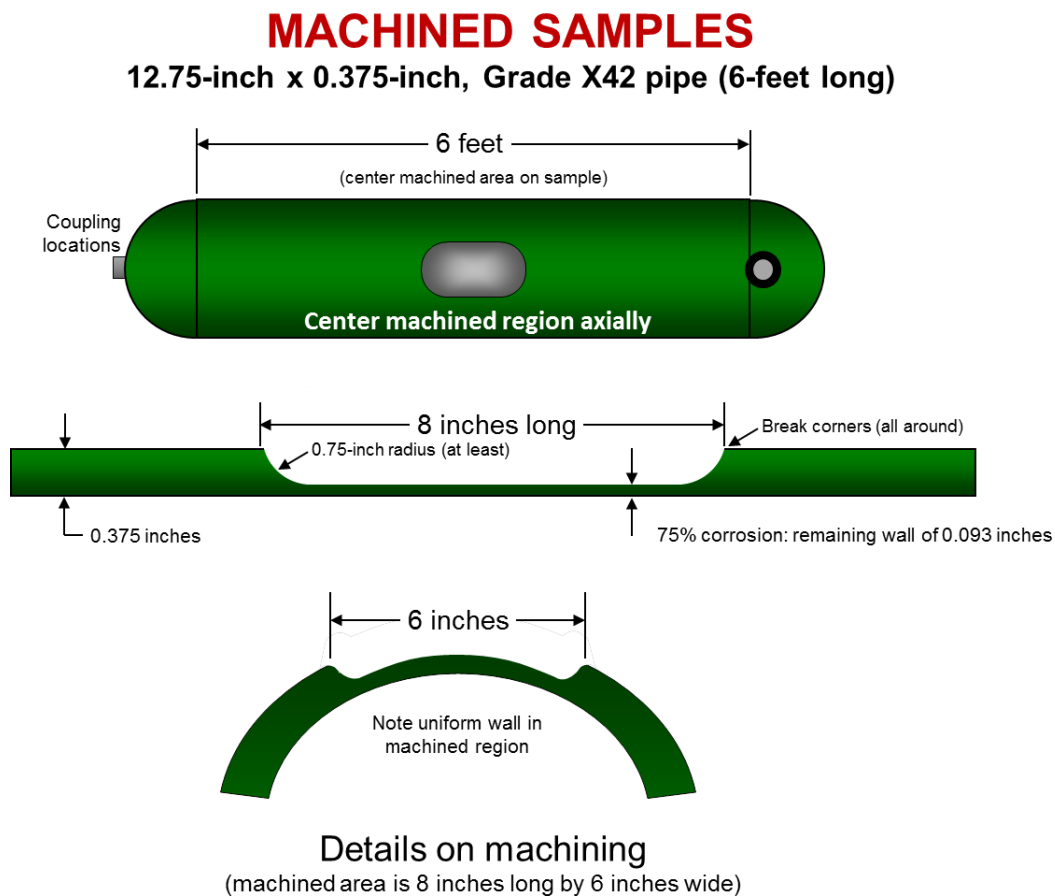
Schematic diagram showing details on the corroded pipe samples
